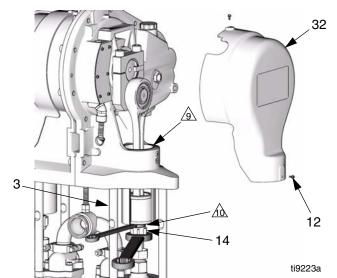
Remove Coupling Nut (Stand Side Shown)
